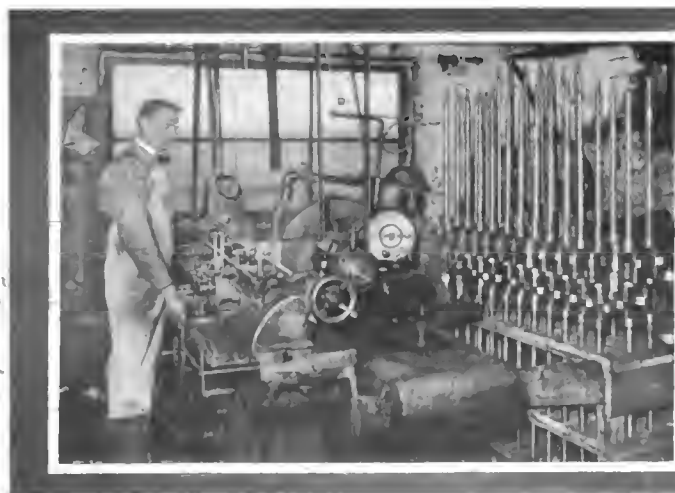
Grinding crankshafts to within three ten-thousandths of dead accuracy
